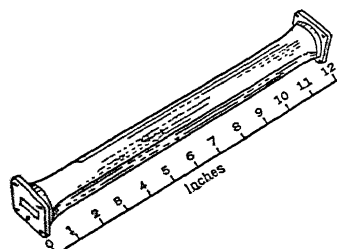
Rubber-covered Flexible Wave-guide Assembly (Courtesy McGraw-Hill Book Co.)
